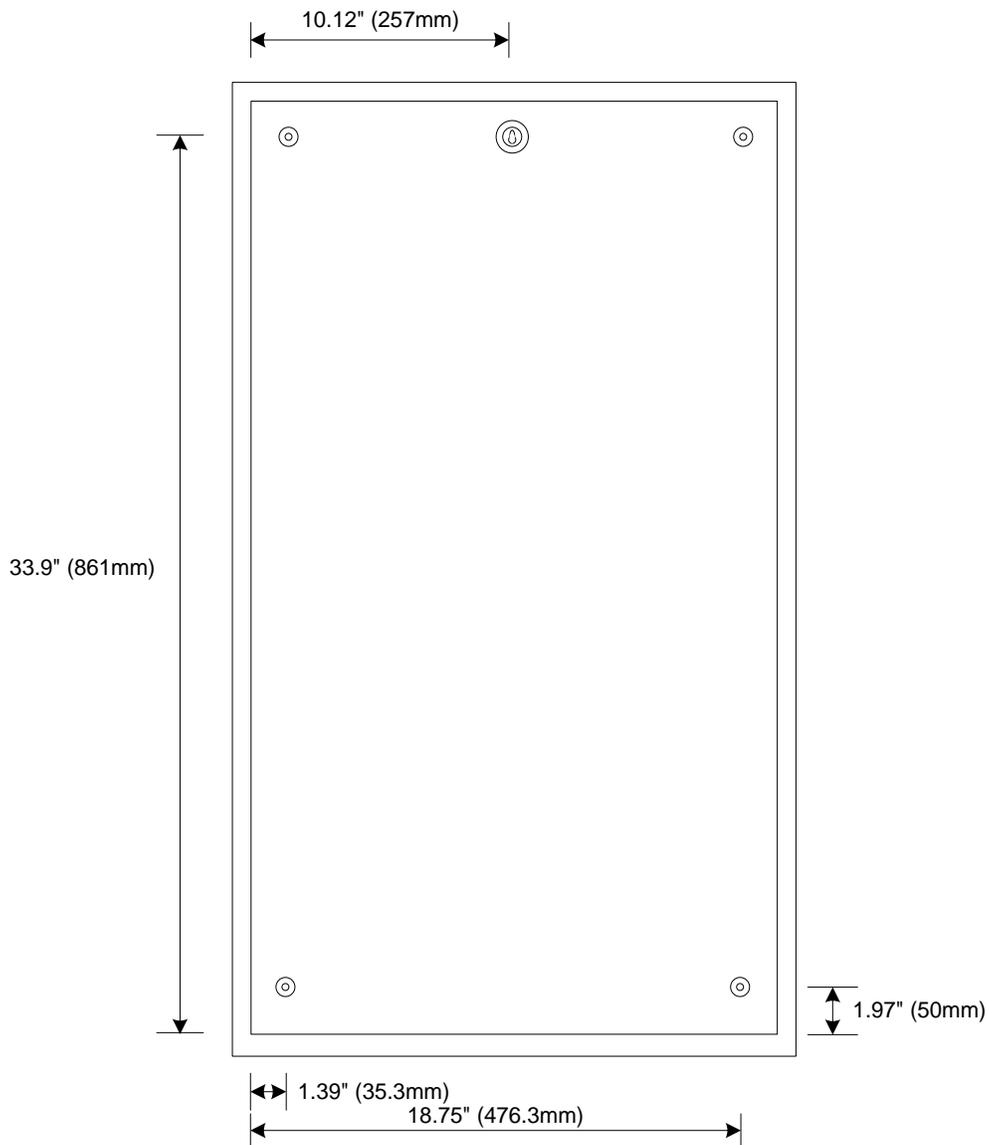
NX-CC02-BB-BB Mounting Dimensions
